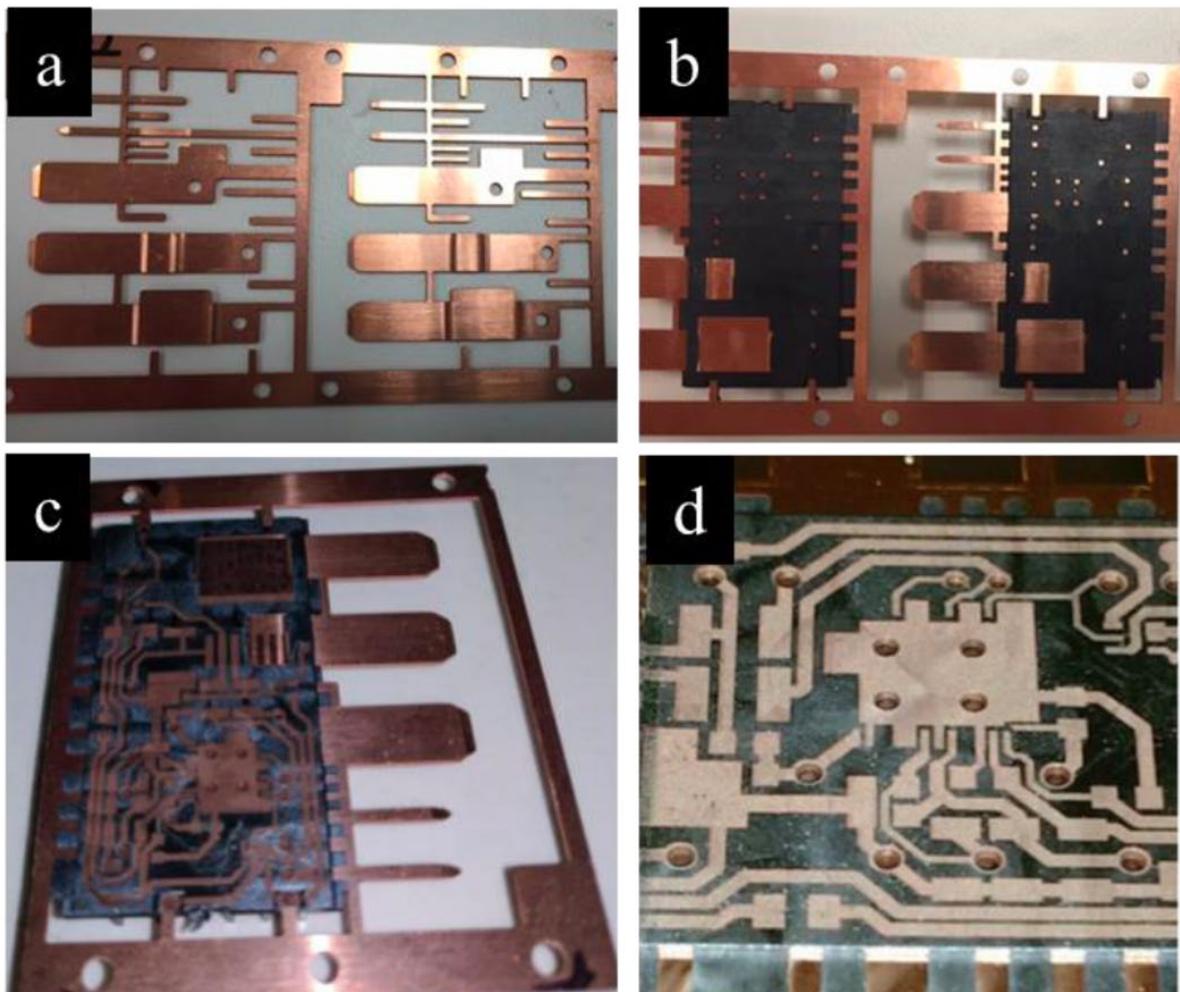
Four steps of ASEP manufacturing: a) metal stamping; b) overmolding with LCP; c) laser marking the surface; d) inkjet printing of nanoparticle metal and solder paste.
